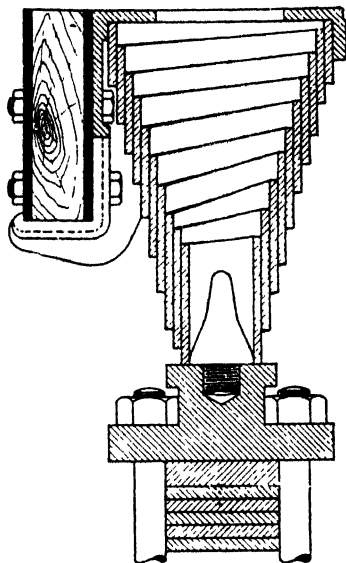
VOLUTE HELPER SPRING FOR MOTOR BUS.
